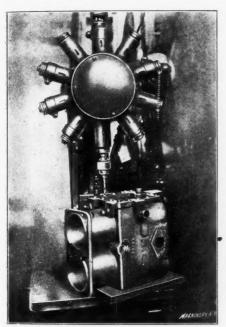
Drilling and Tapping Holes for Water Jacket Cover
